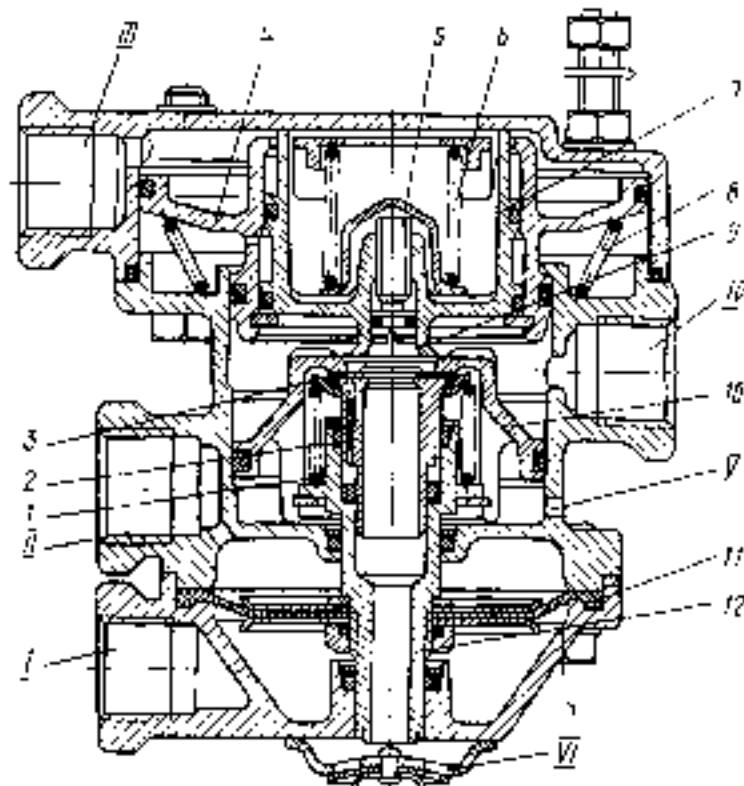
Control Valve with Trailer Brakes with Double Line Drive:
